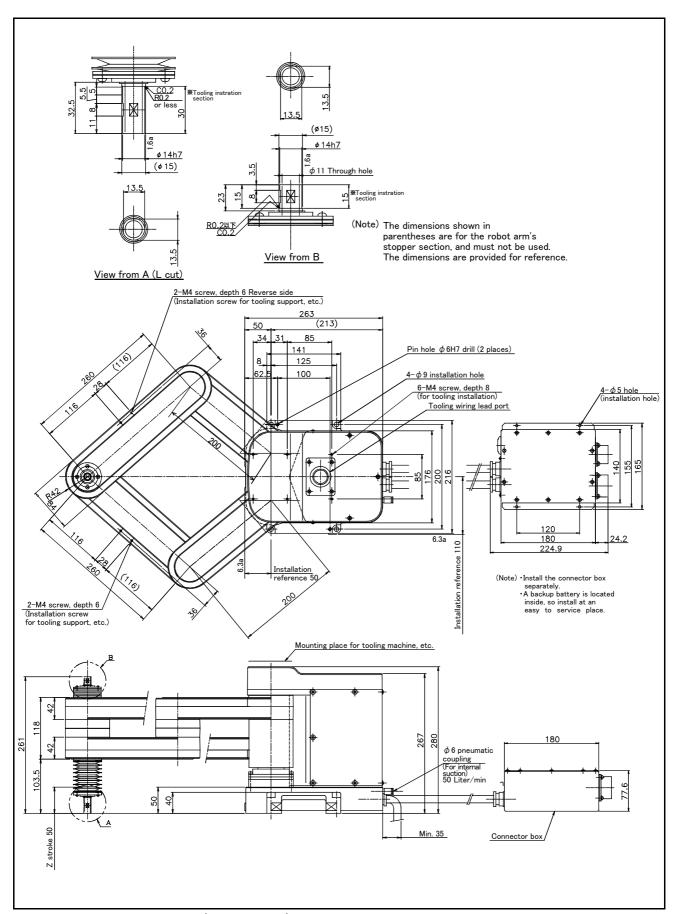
Outside dimensions (RP-5AHC-SB)
